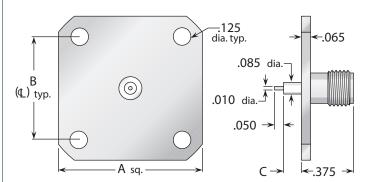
(1" square flange, interchangeable with type N standard flange size)
